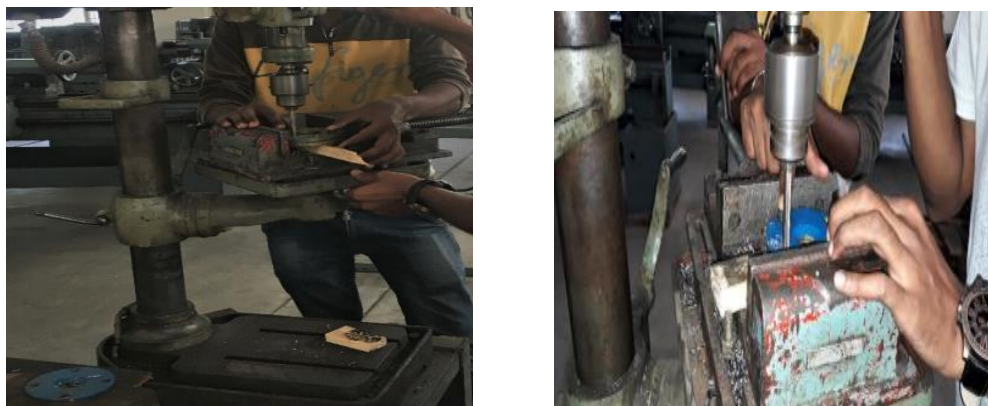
Drilling on the processed material using drill bit in the workshop, view - 1 & view - 1
